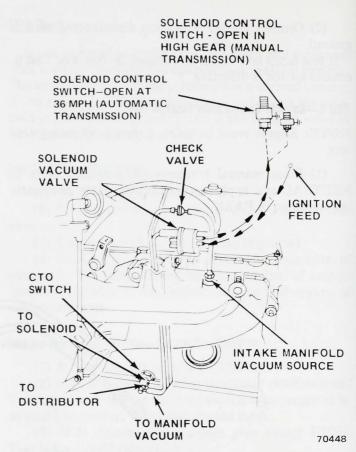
G-21 Vacuum Spark Control Check Valve—Six-Cylinder
